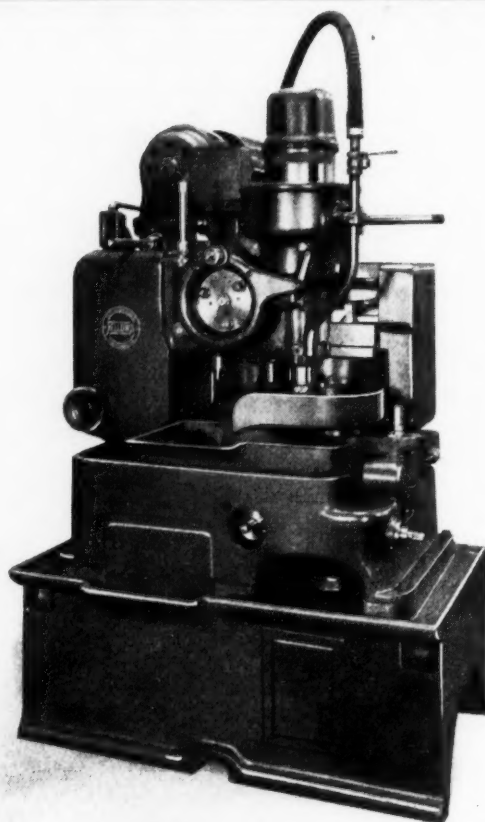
Fellows Gear Shaper Designed to Use Gap Type Cutters that Rough and Finish Gears in One Operation
